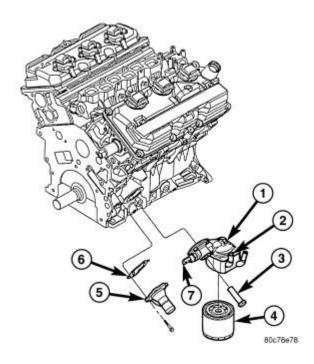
Engine Oil Cooler and Filter Ad Courtesy of CHRYSLER LLC
